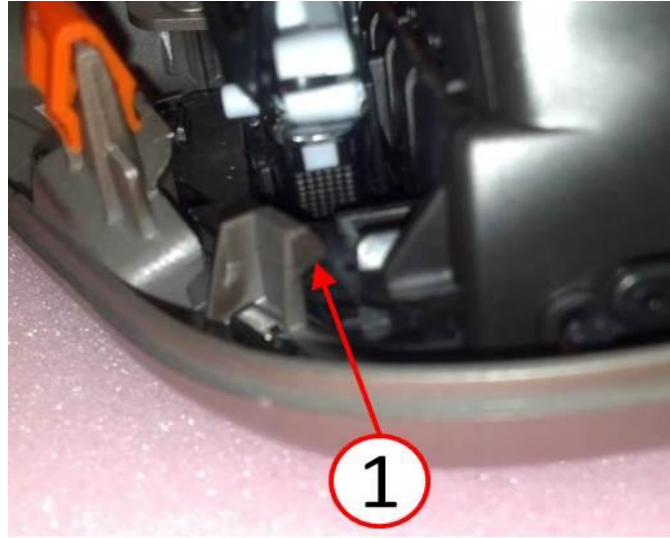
HVAC Outlet Lower Outer Corner Attachment
